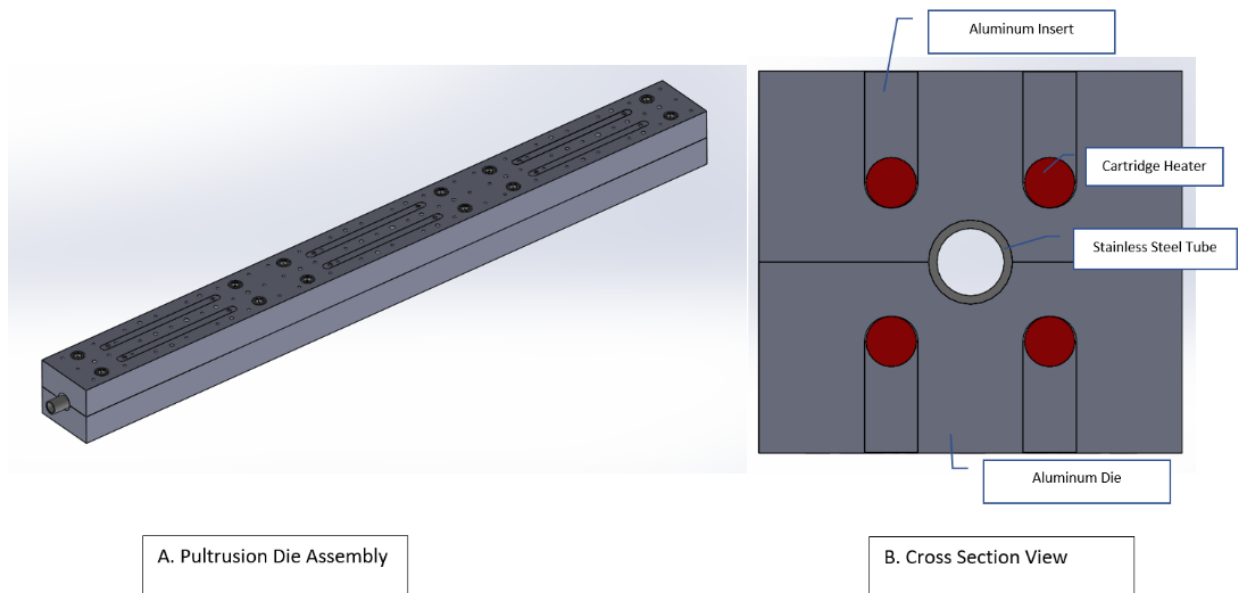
Pultrusion Die Assembly and the Cross-sectional View.
